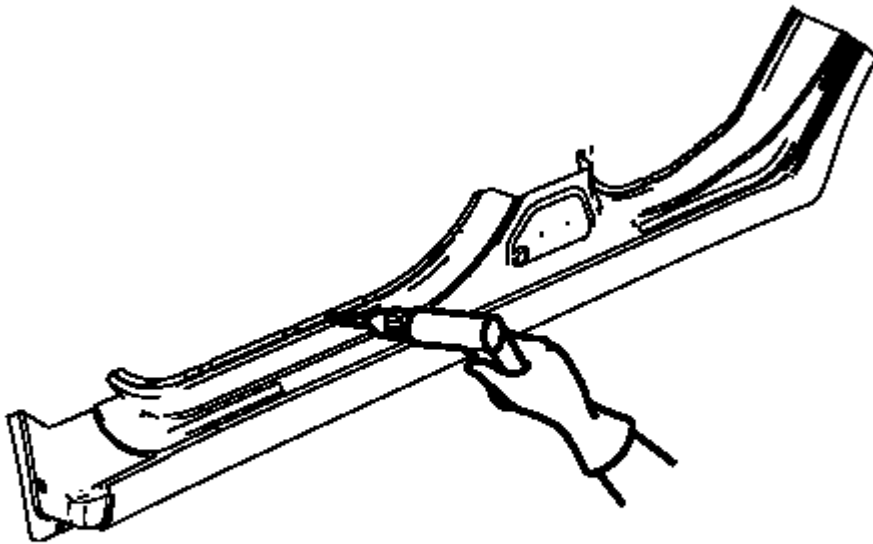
Drill 8 Mm (5/16 In) For Plug Welding Along Edges Of Rocker Outer Panel
